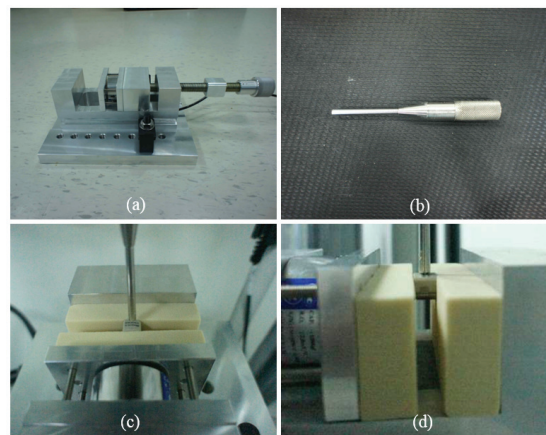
Pictures of expulsion testing jig: (a) Test fixture mounted to MTS machine, (b) Pullout rod, (c) and (d) Starting position for impaction
